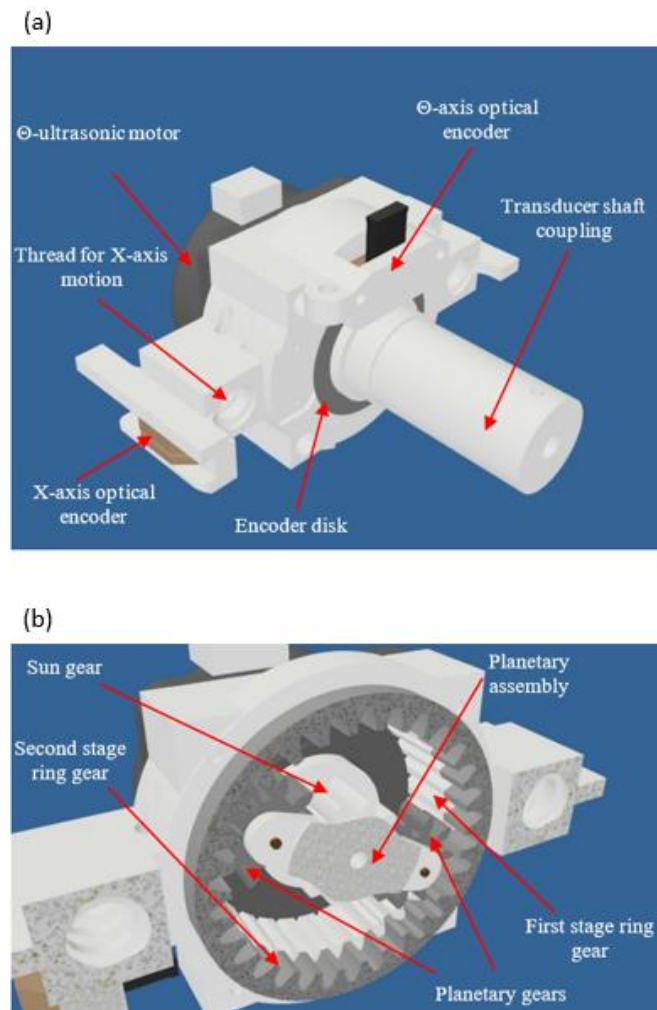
Angular axis (Θ -axis) a) view of the outside part, and b) view of the inside part and the mechanism.
